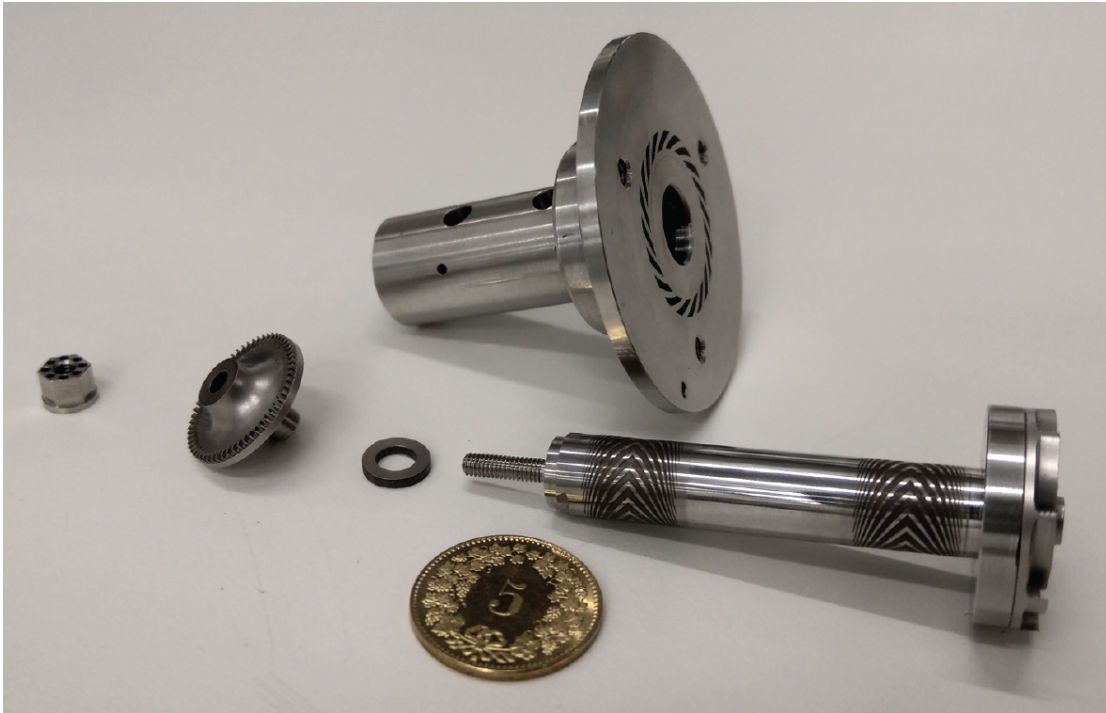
Manufactured bearing bushing (top) and rotor (bottom) for enhanced groove geometry exploration. From left to right: Turbine nut, turbine, axial shim, tie bolt, rotor $\alpha_{\beta_{var}}$ with fan
